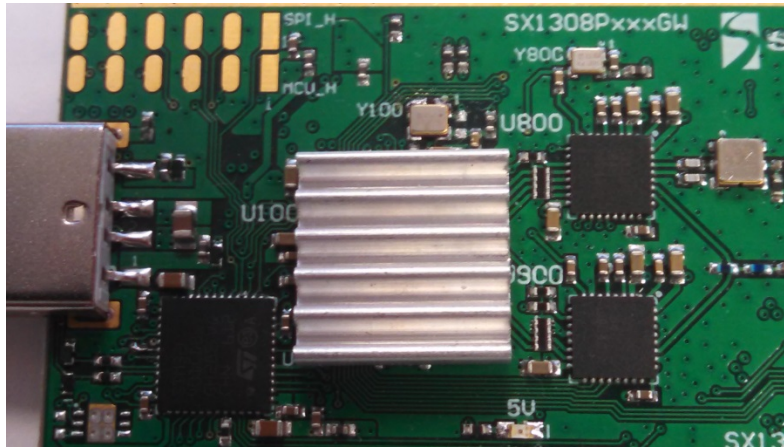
Heat Sink on Top and Bottom of SX1308 – Top View
